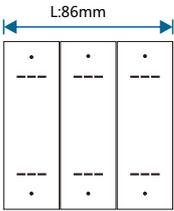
Dimensional Drawing - Front View Figure 12. Dimensional Drawing -Side View
